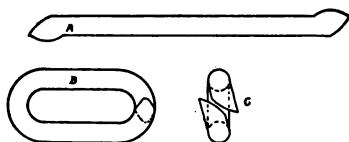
Link exercise. A—Stock showing method of scarfing. B—Stock bent into link ready to weld. C—End view showing scarfs in place.
